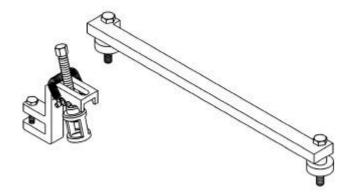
COMPRESSOR, VALVE SPRING - 8453 Courtesy of CHRYSLER LLC
